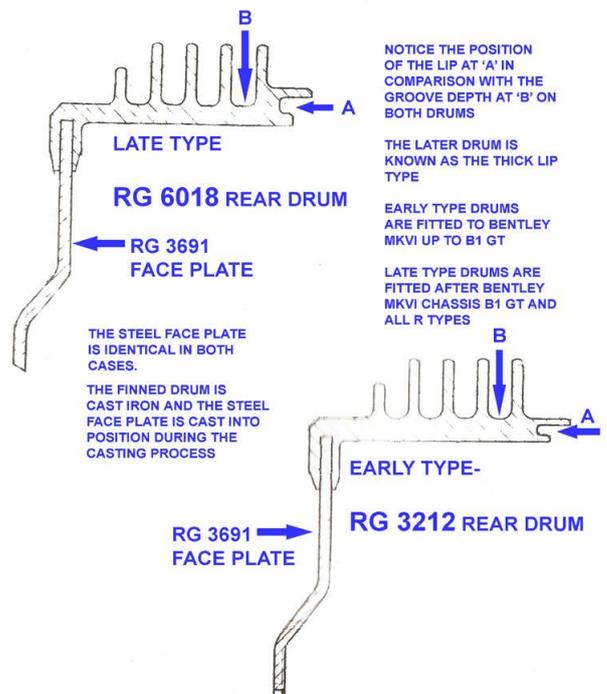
Face plate of the rear drum showing how it attaches to the cast iron drum section during manufacture.
